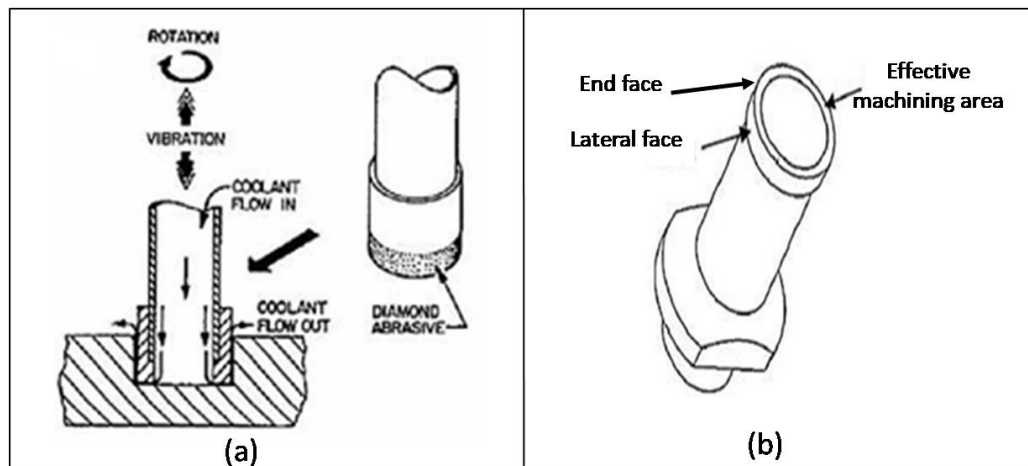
(a) Rotary Ultrasonic Machining (RUM) process (Li et al. (2005)), (b) 3-D view of RUM tool (Jain and Pandey (2016))
